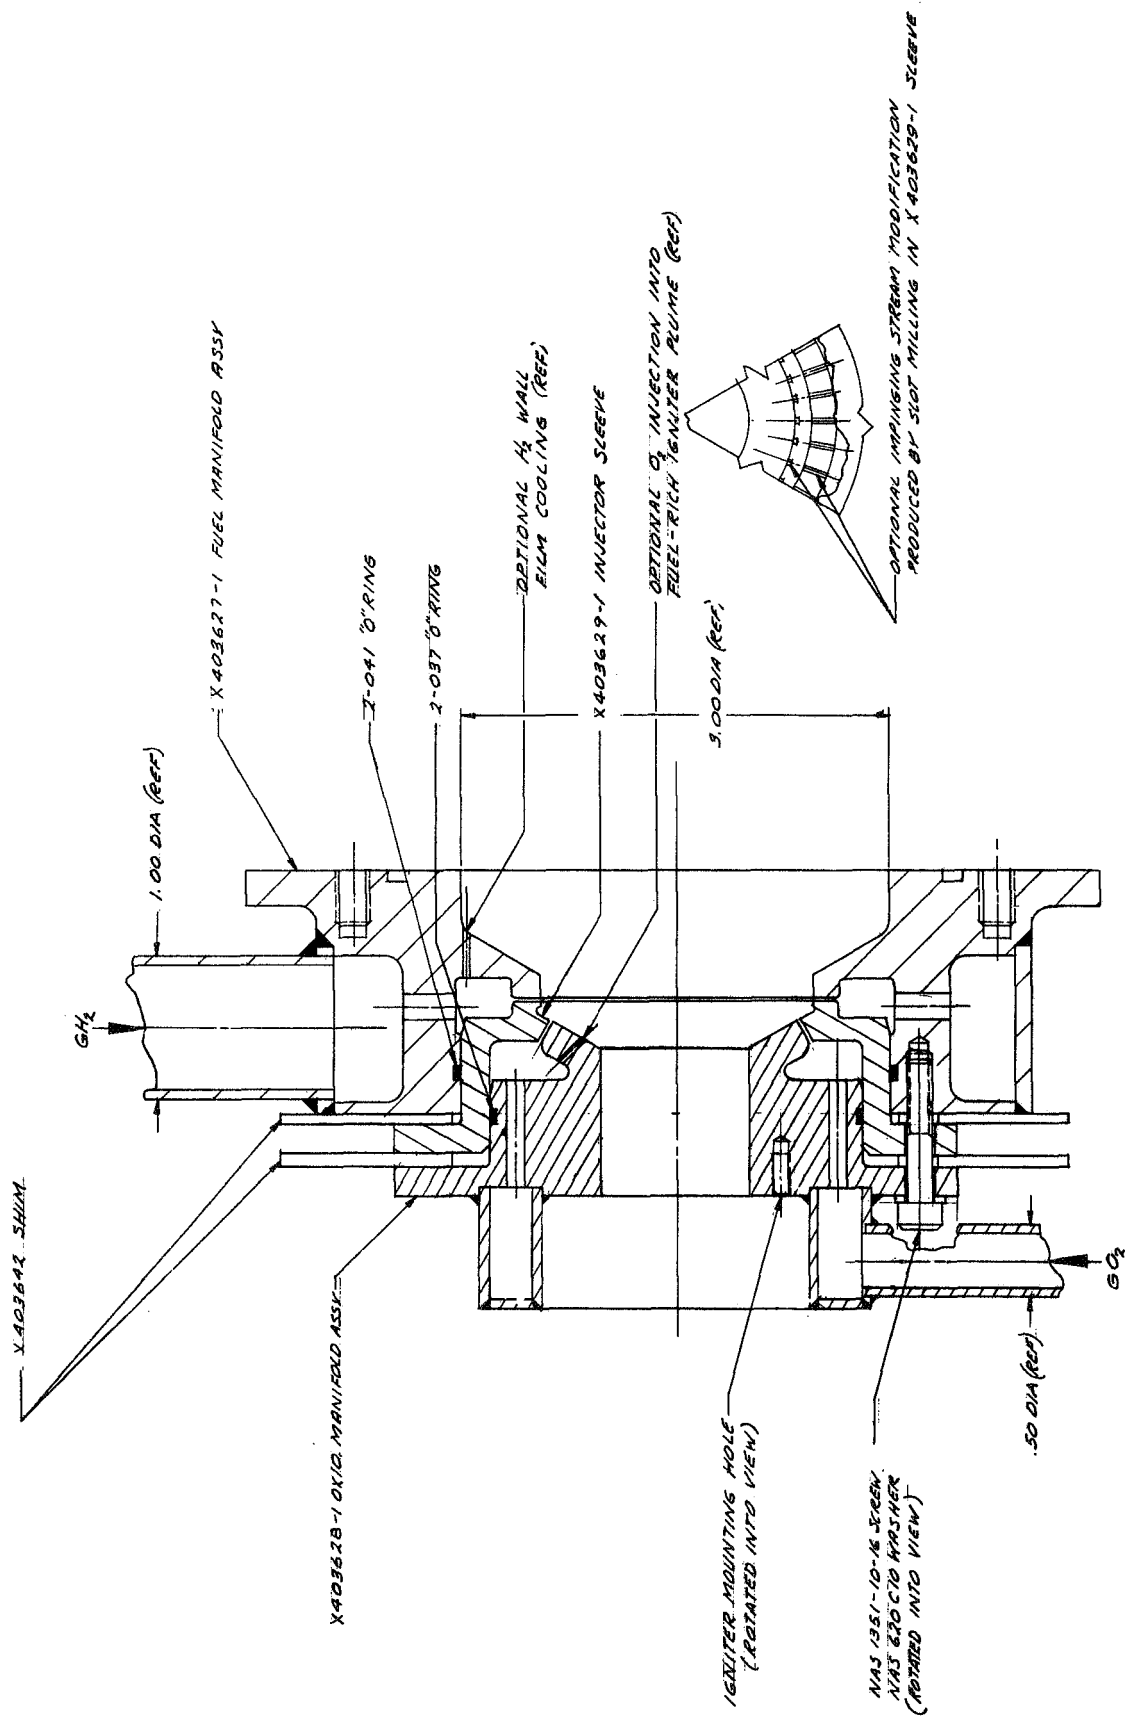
Main Injector Assembly—Low Chamber Pressure Thruster
